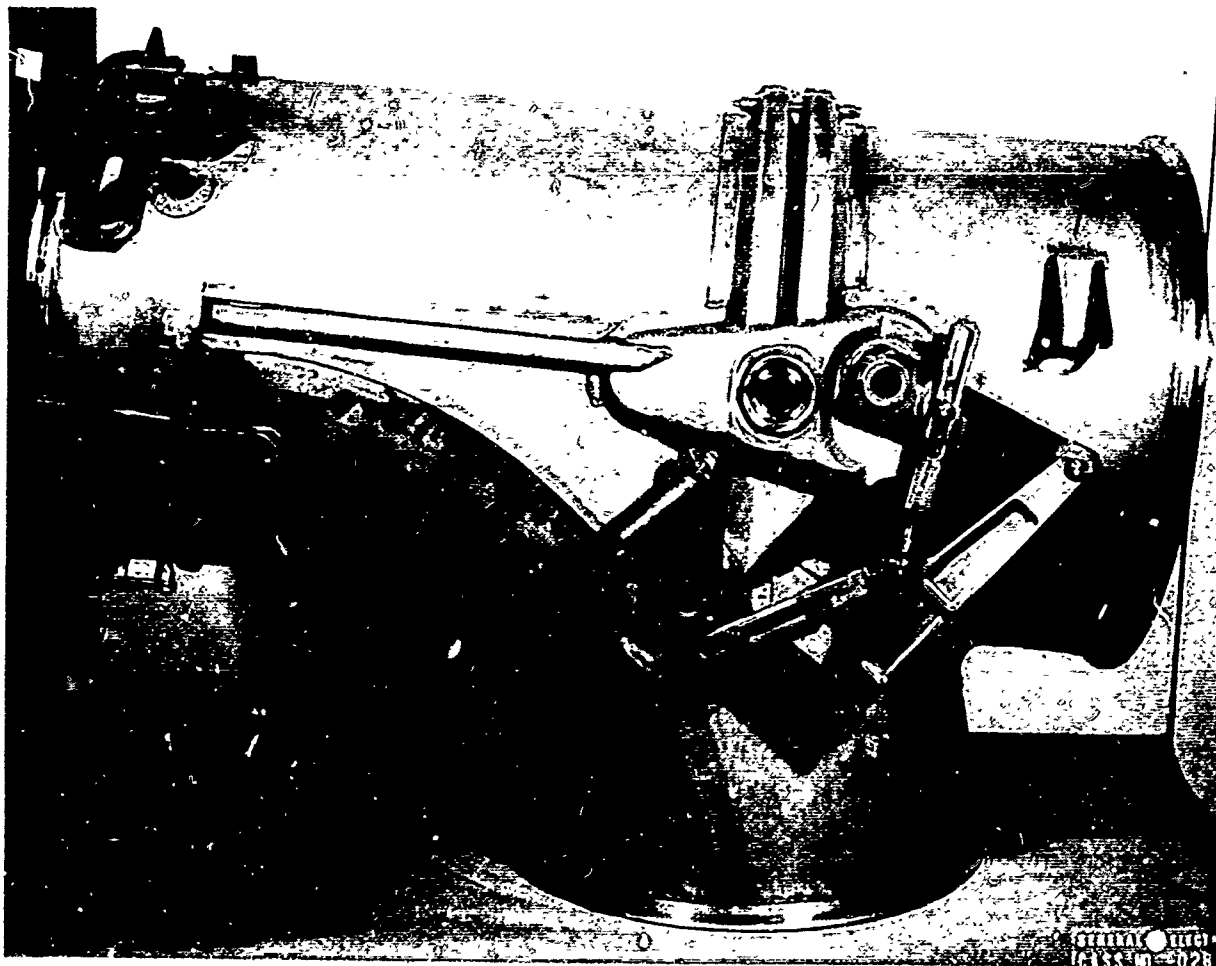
DIVERTER VALVE ASSEMBLY
